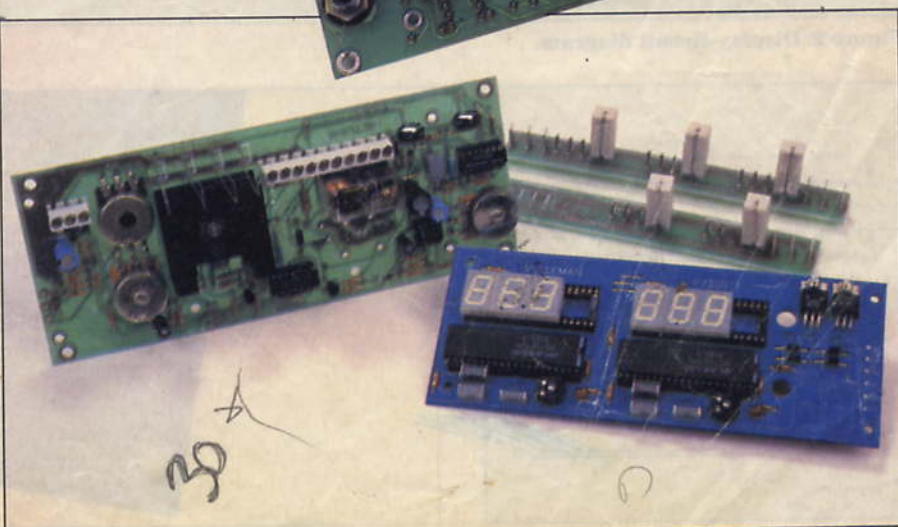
The four assembled PCBs of the Laboratory Power Supply.
